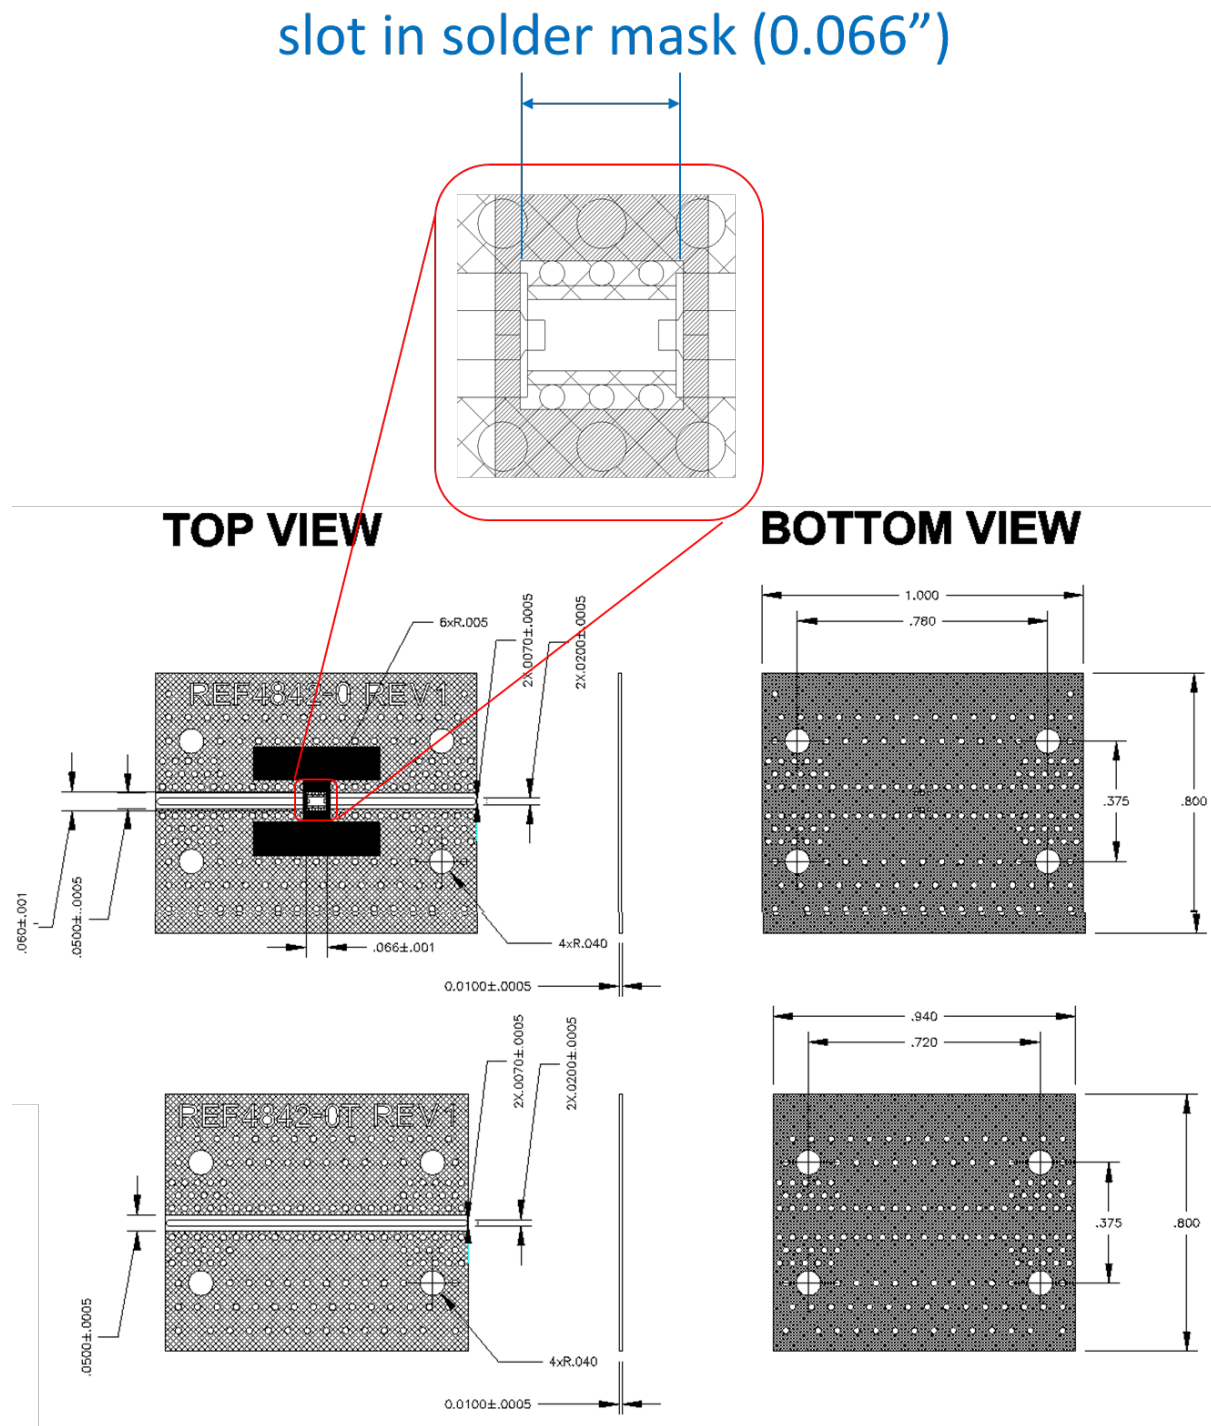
Detailed view of the test board used to test broadband attenuators of TSX series
